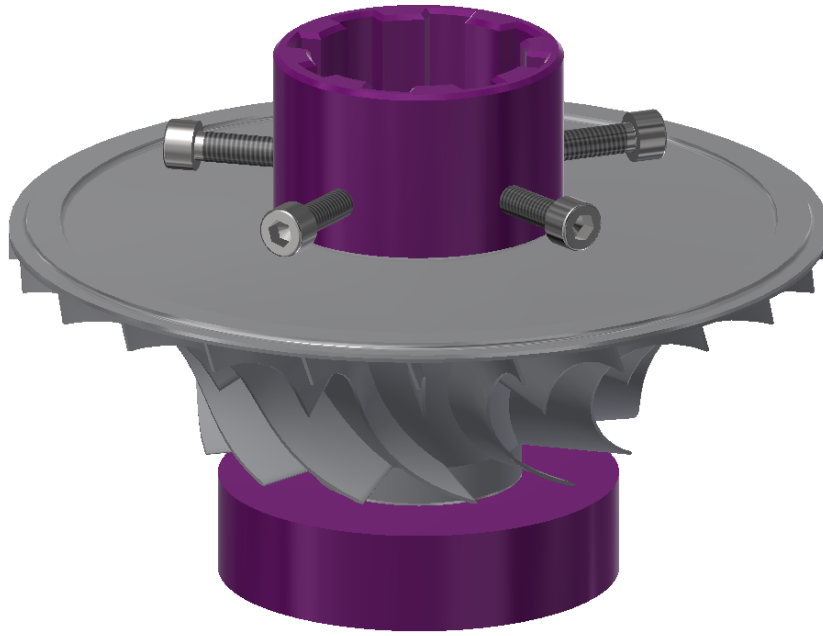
Alignment Tool and Support Block Relative to Impeller
